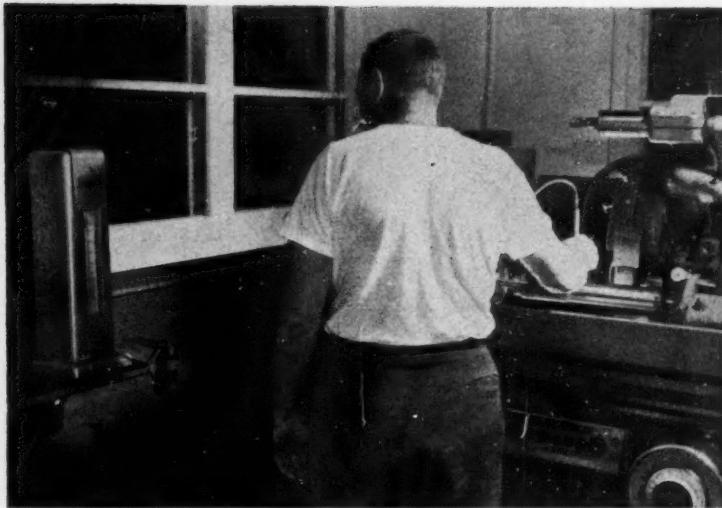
Checking the Outside Dimension with an Air Gauge Before the Work is Removed from the Grinding Machine. To Enable the Close Tolerance to be Maintained, the Plating Thickness is Specified for Each Barrel
